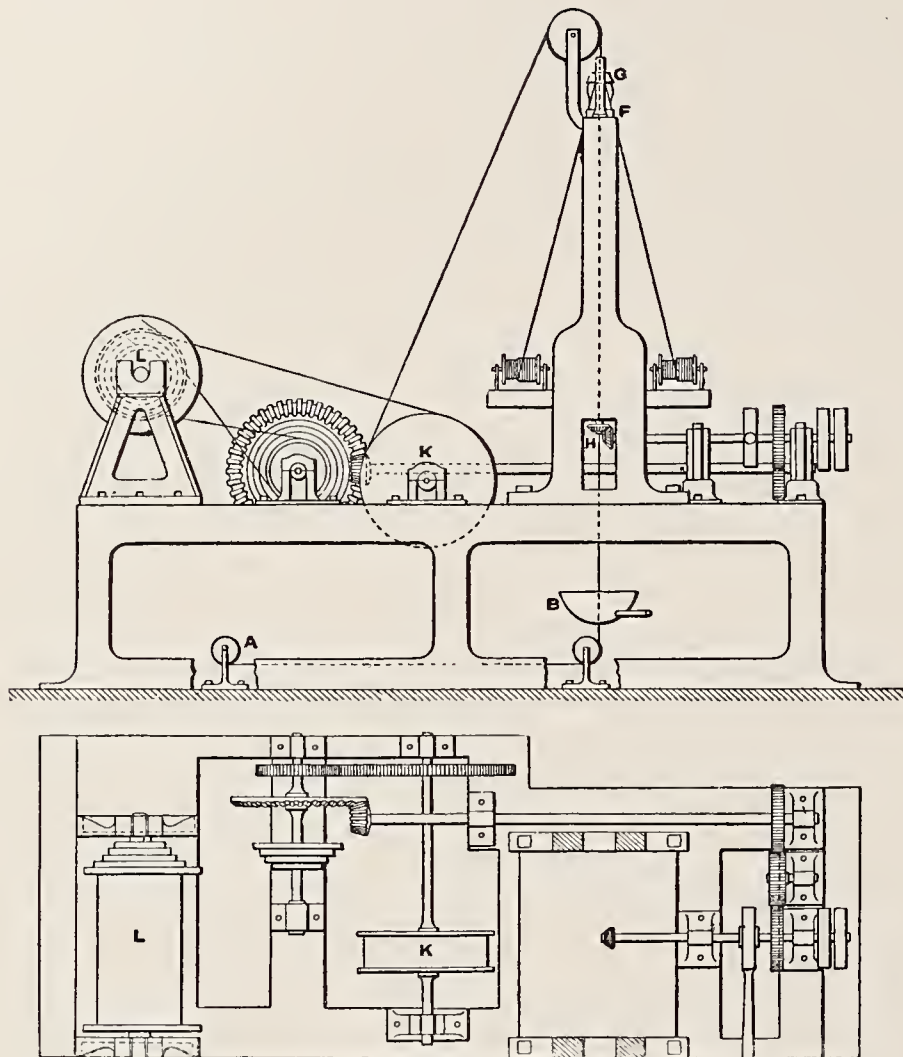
ELEVATION AND PLAN OF MACHINE FOR STRANDING CONDUCTORS
